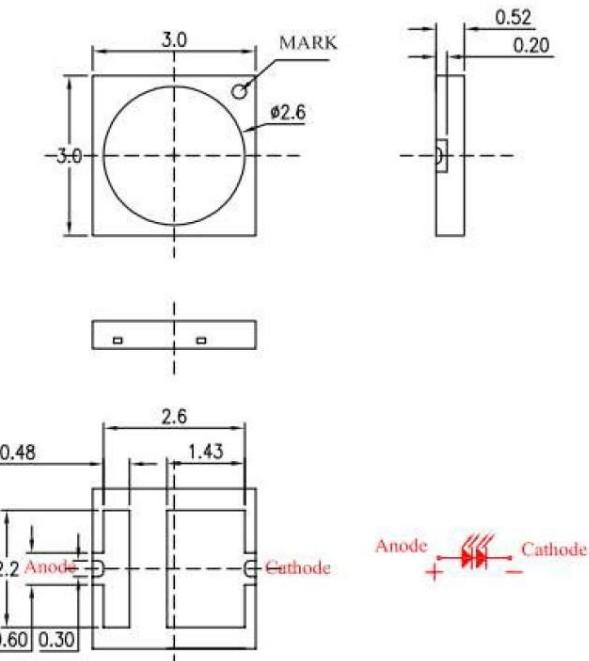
Mechanical Drawing for LUXEON 3030 2D. All dimensions are in millimeters.
